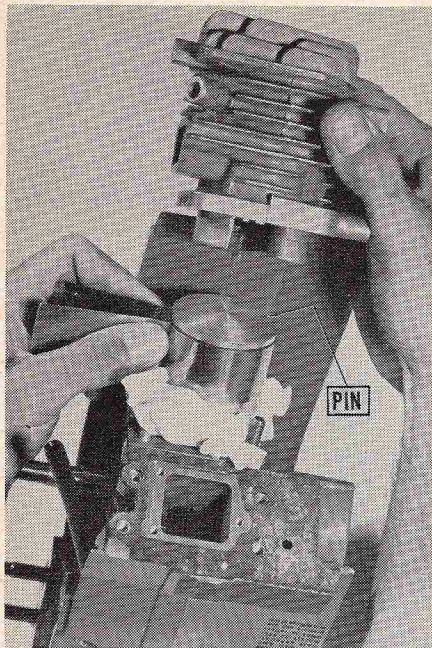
View showing cylinder being installed over piston. Piston is held upright by rags stuffed around rod. Make final check to be sure piston ring pin is towards intake side of cylinder as shown.
